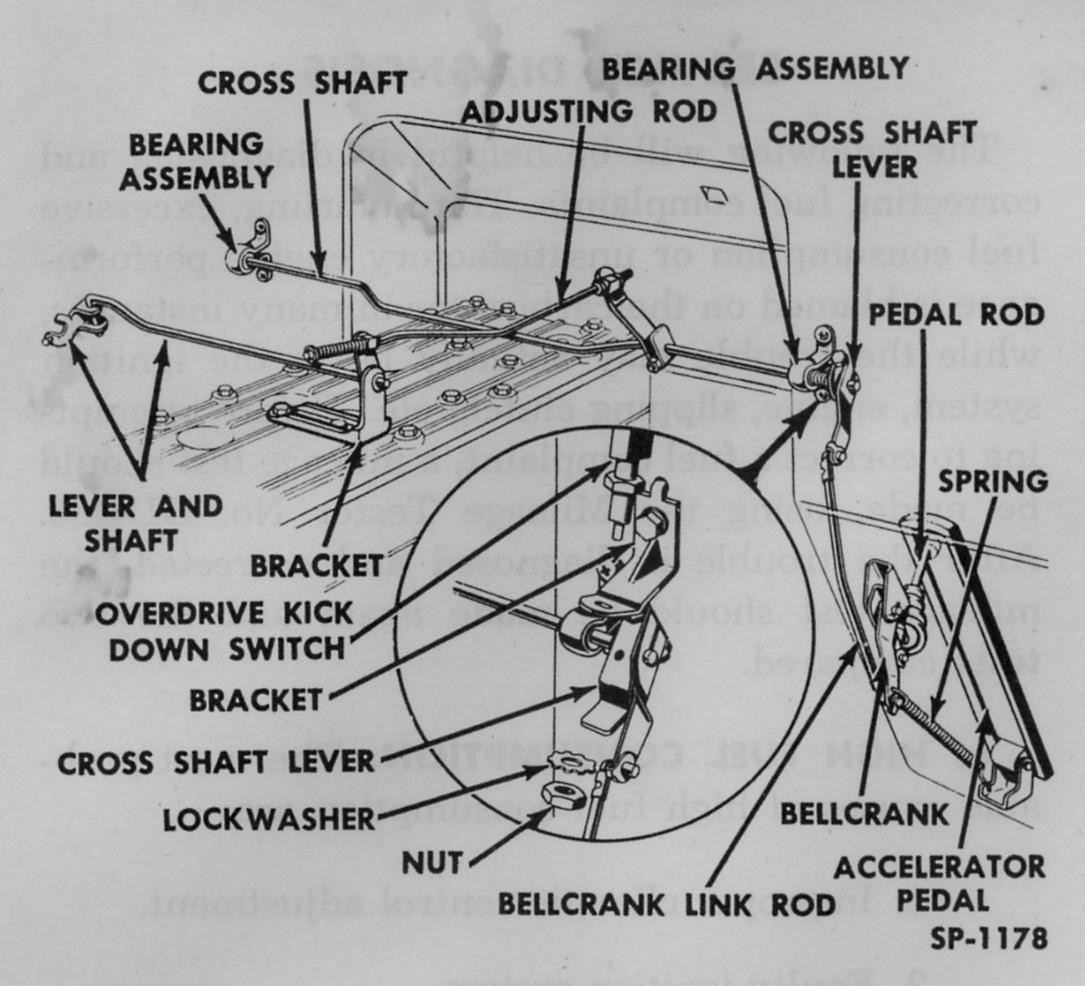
Frazer Accelerator Linkage with WGD-781S or 813S Carburetor
